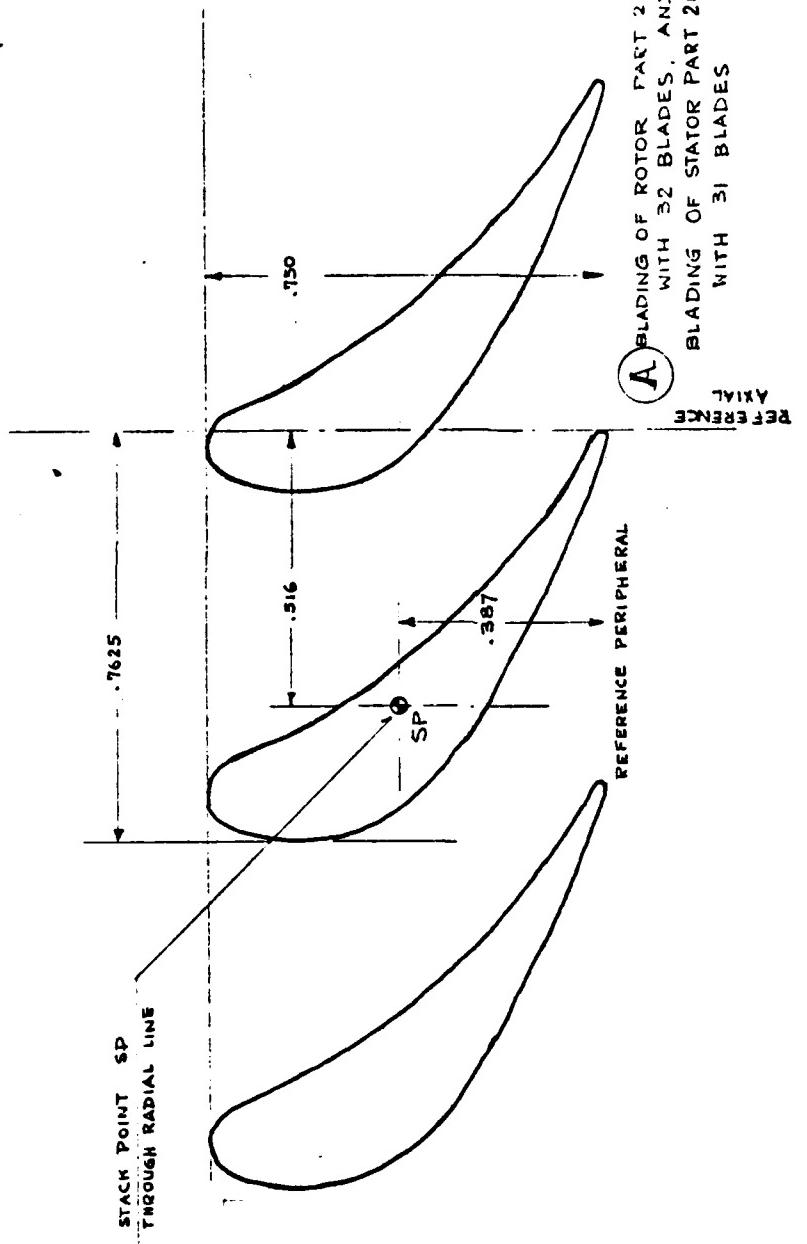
TURBINE ROTOR AND STATOR BLADE SHAPES
